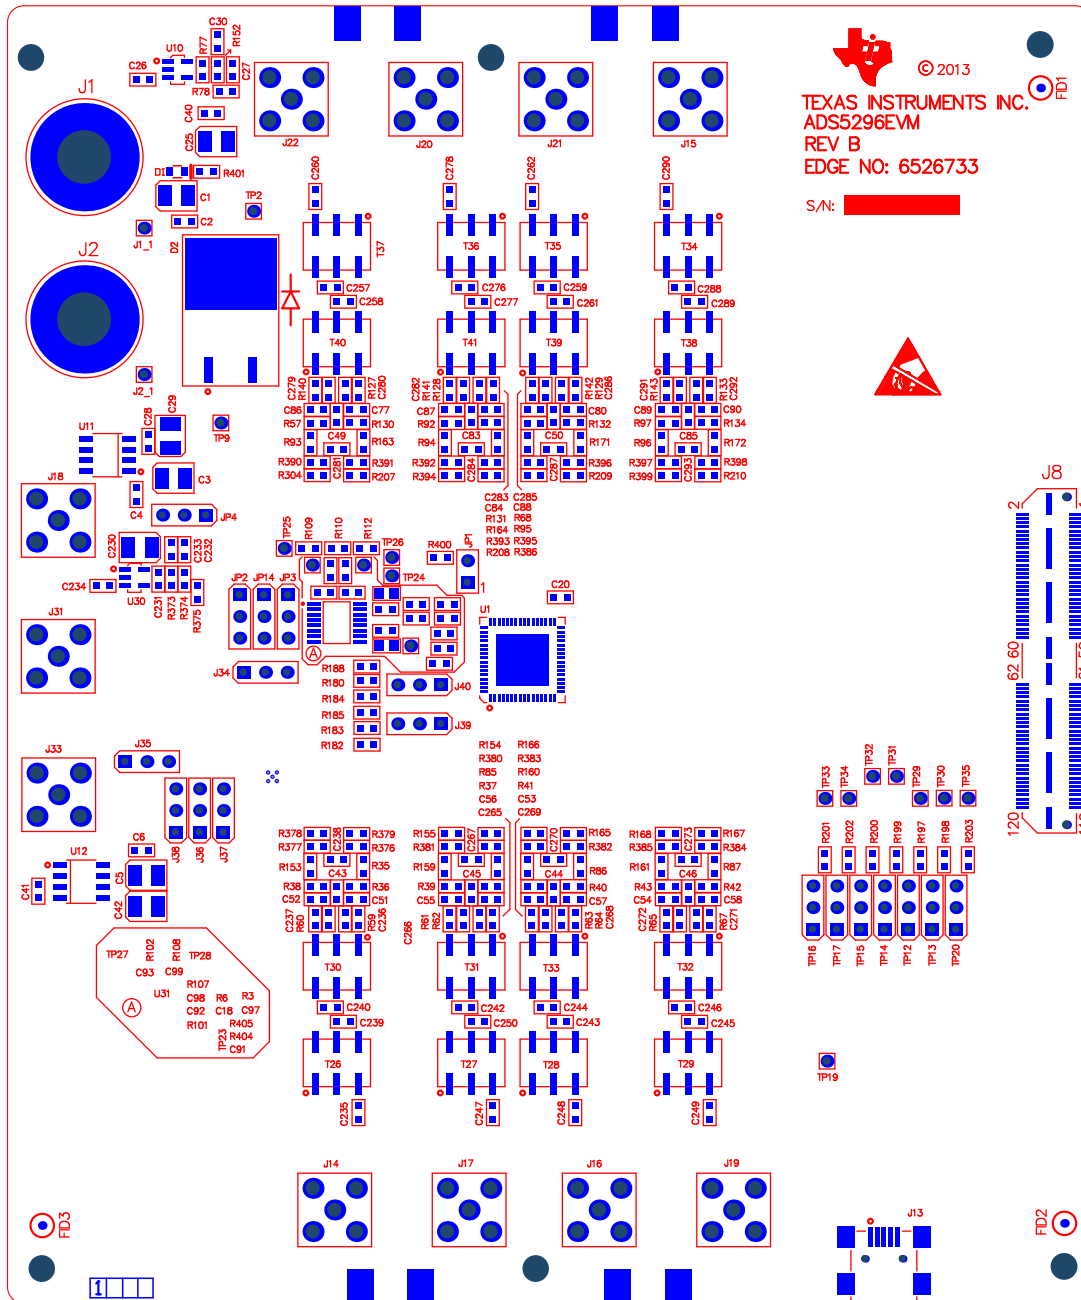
ADS5296 EVM Top Layer Assembly Drawing – Top View
